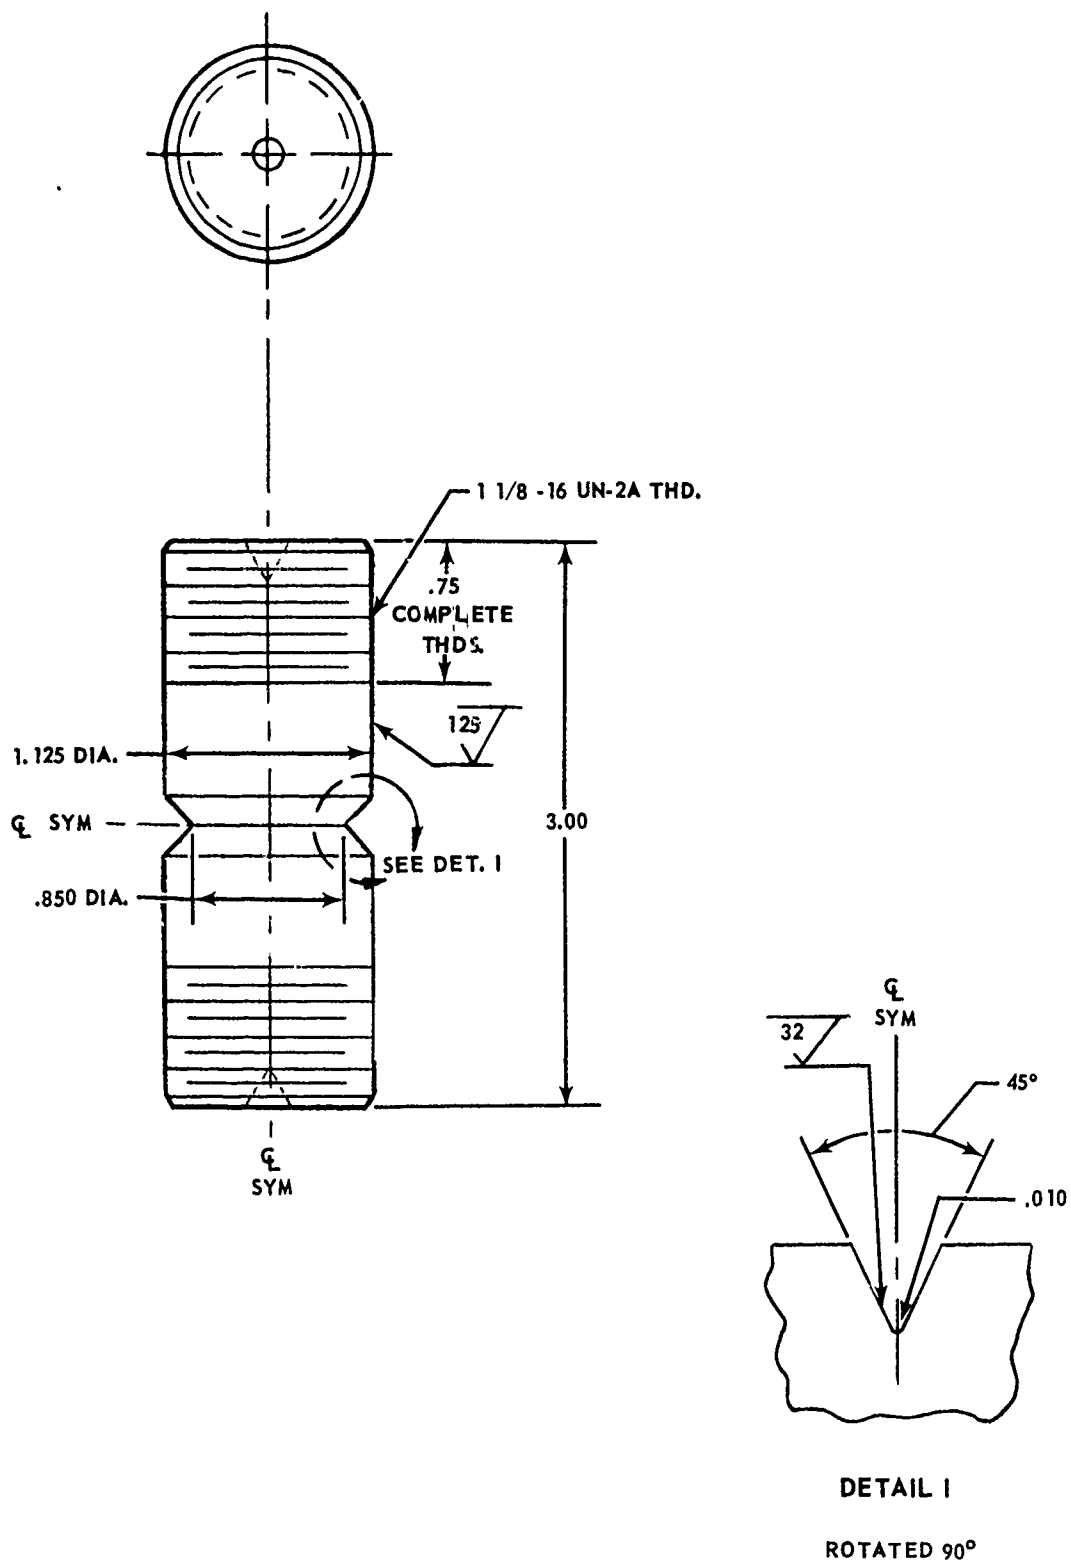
1-1/8 INCH FATIGUE CRACKED NOTCH TENSILE SPECIMEN
